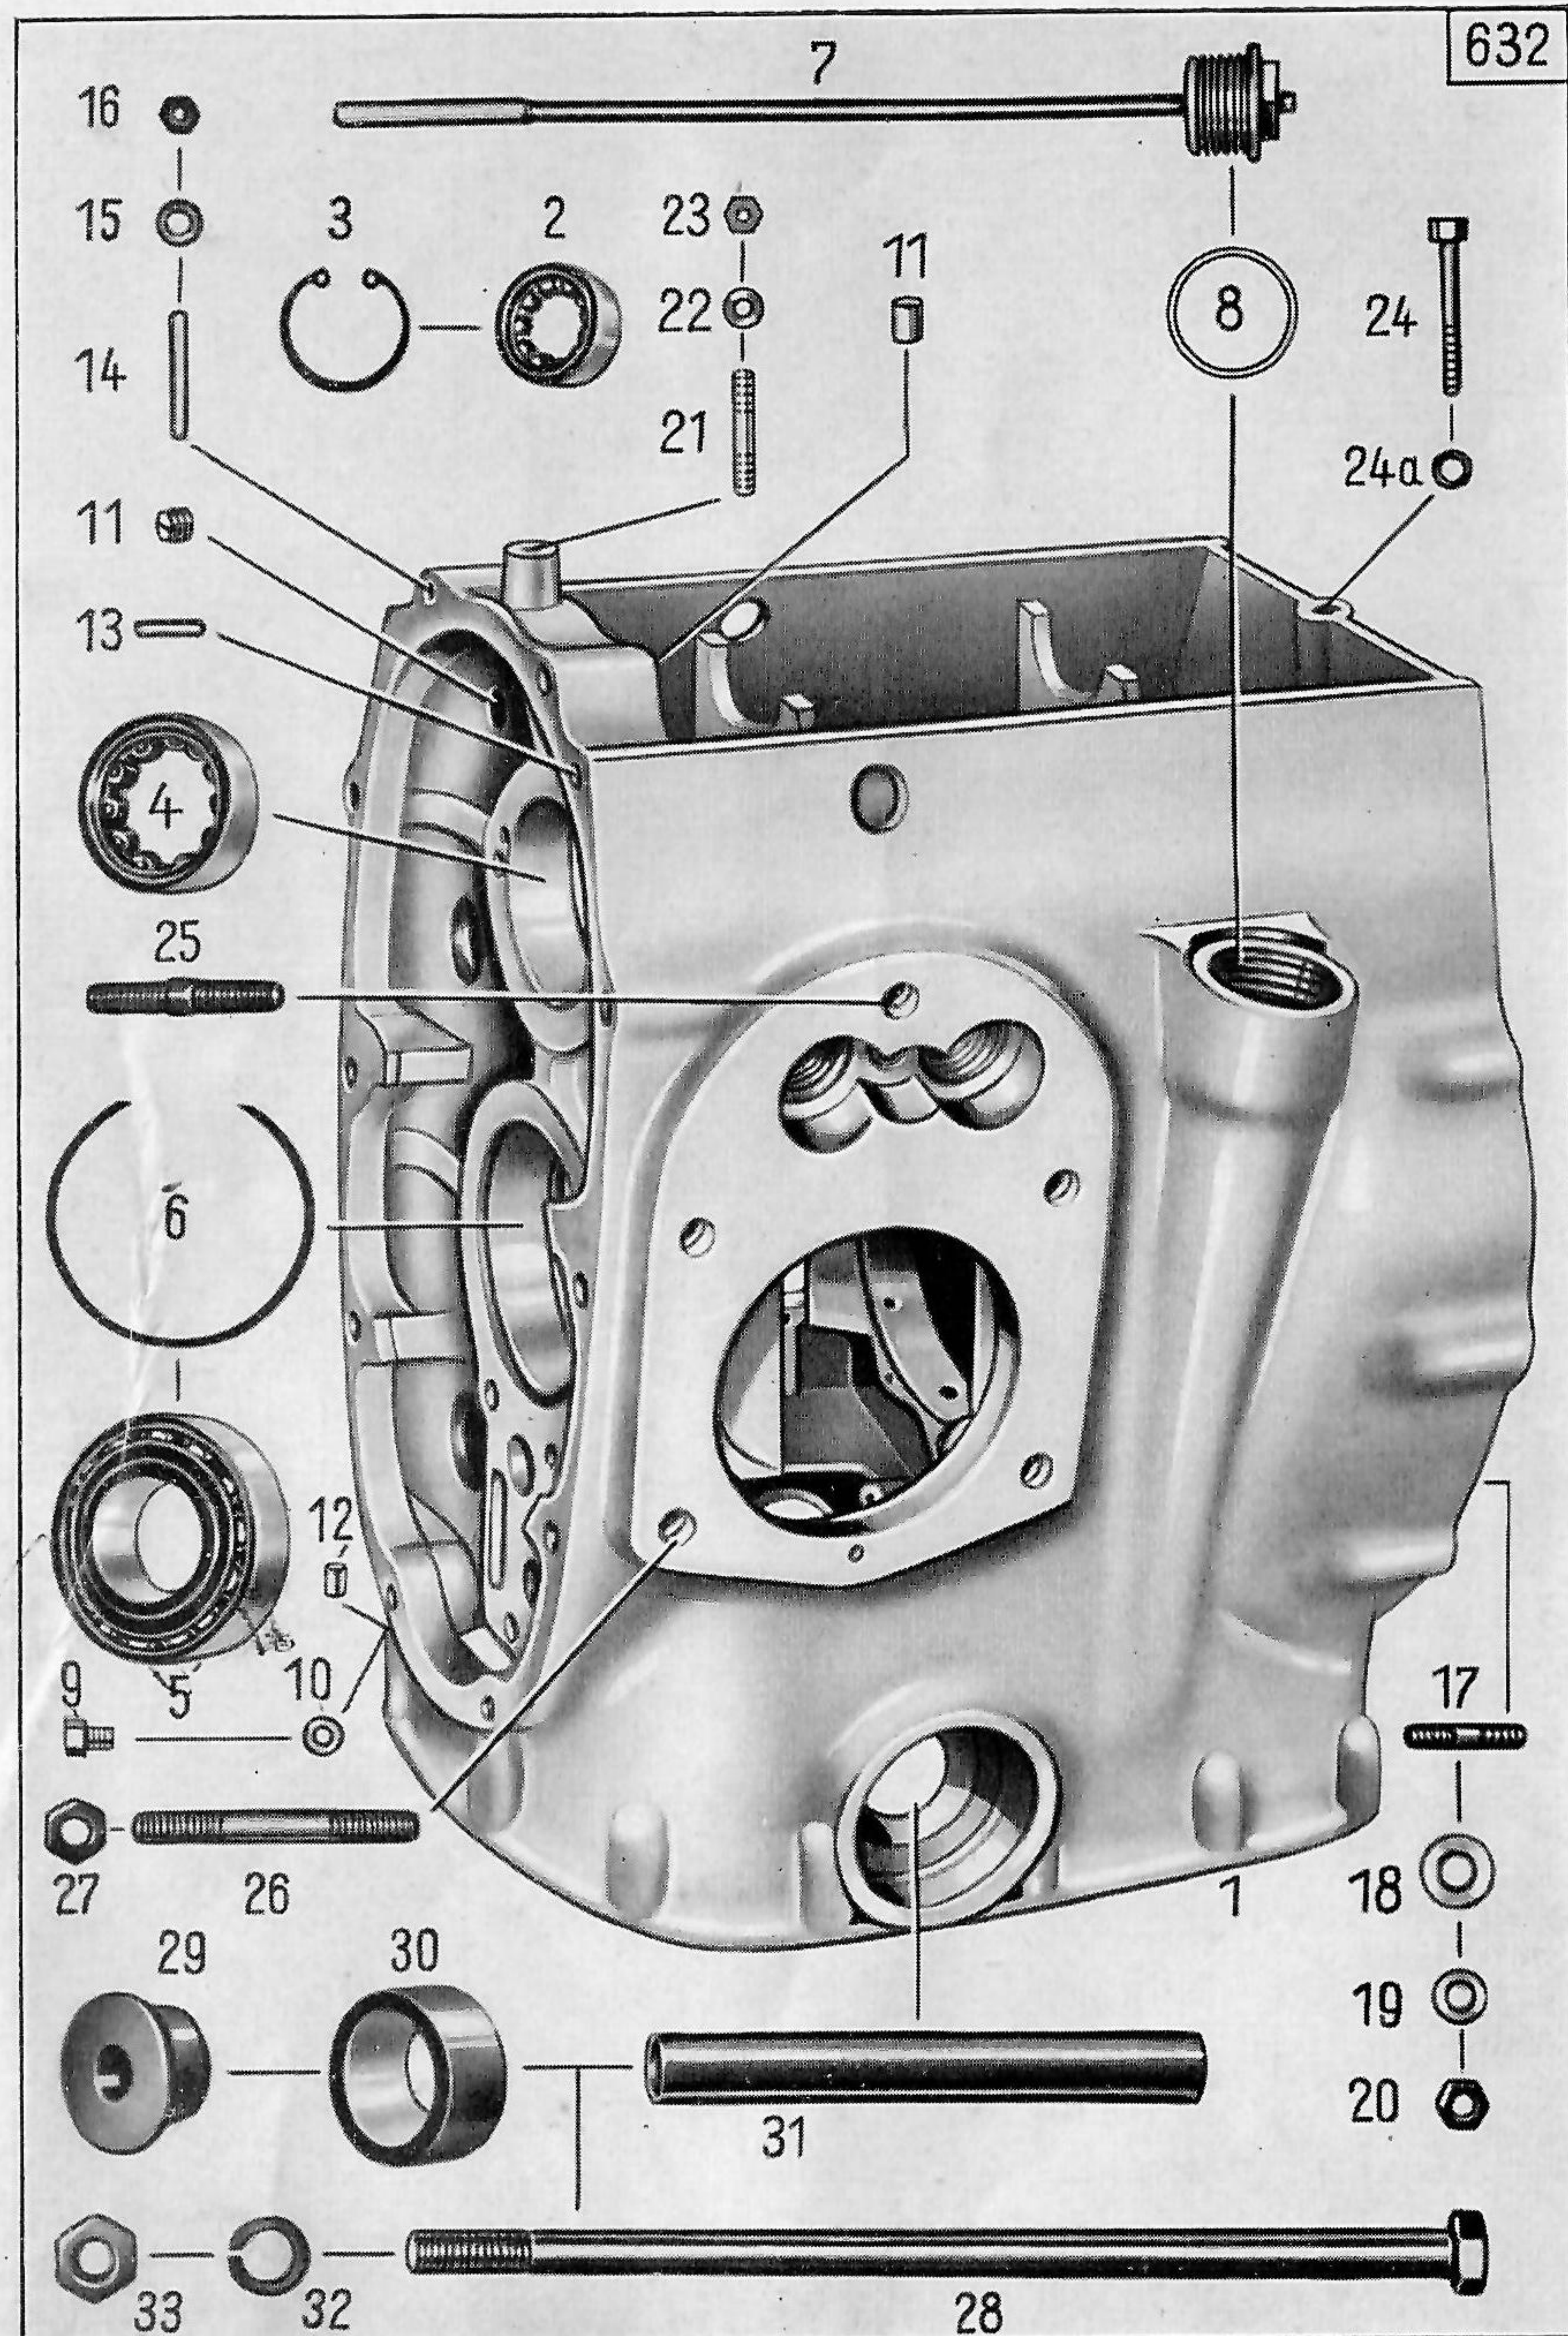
, Group M: b) Housing and Cylinders, Crankcase
